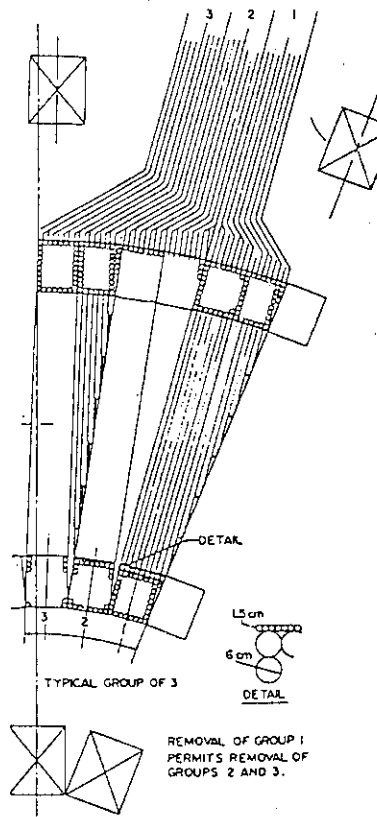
Section Perpendicular to Pole of Machine Showing Two Types of Submodules and Two TF Coils.¹⁸⁾
